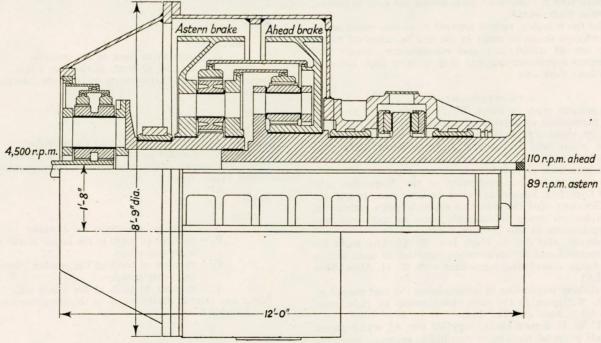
10,000 h.p. main propulsion reverse reduction gear: 4,500/110 r.p.m. ahead and 89 r.p.m. astern
